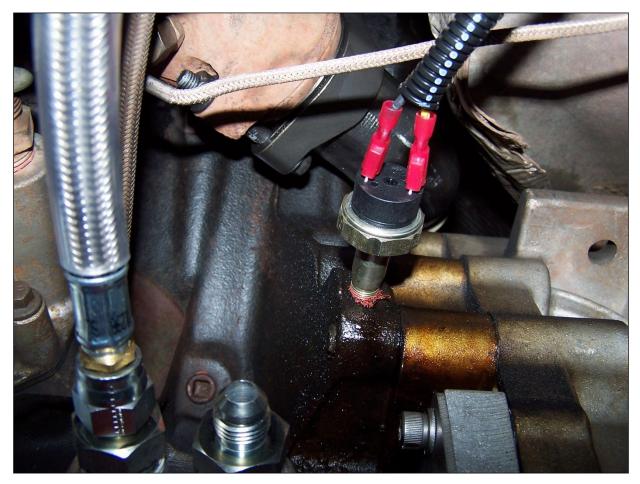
OIL PRESSURE SWITCH INSTALLED – DRIVERS SIDE OF ENGINE BEHIND OIL FILTER
